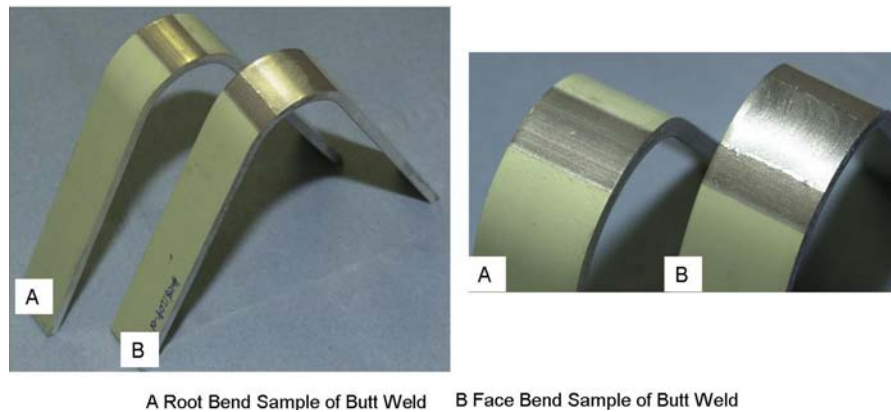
Photographs of sample types specified in EN 910:1996. A) Root bend test of butt weld and B) Face bend of butt weld.
